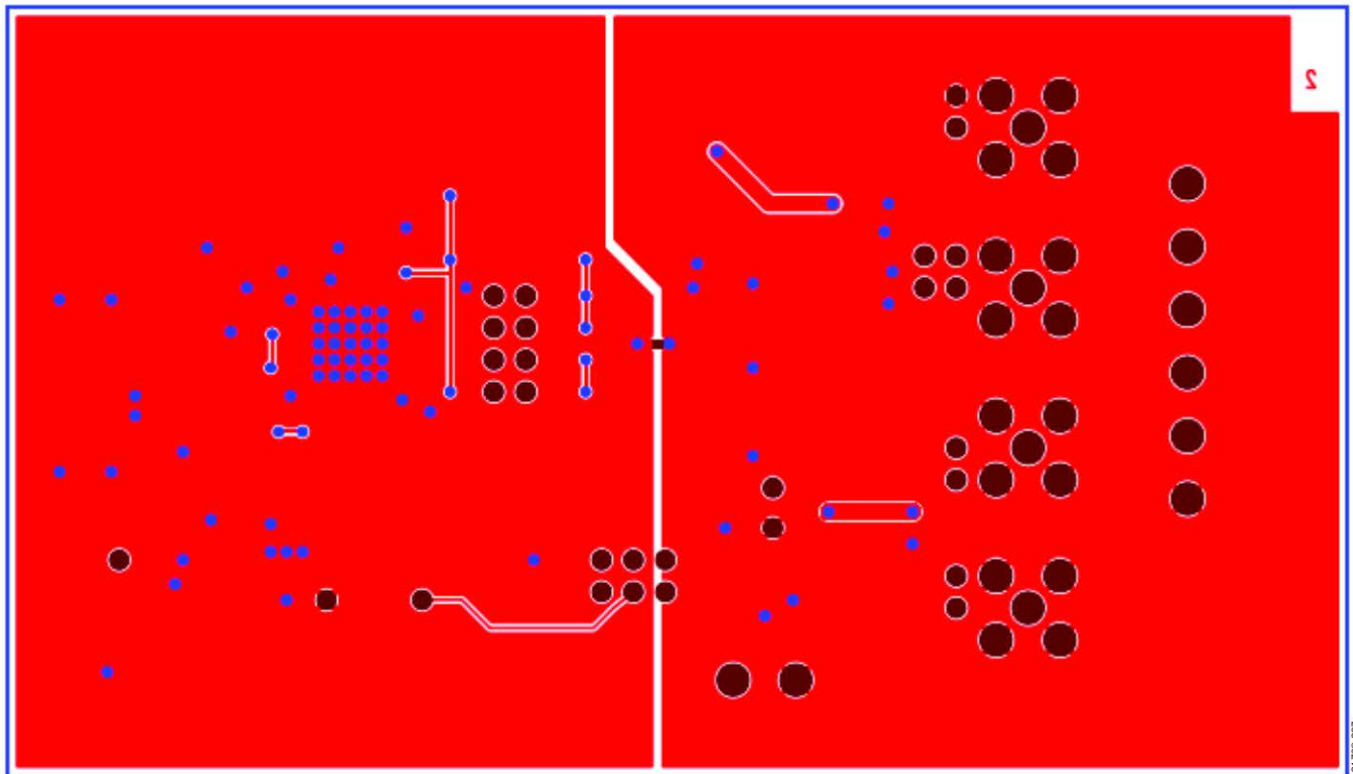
AD7791 Evaluation Board—Component Layout Diagram
